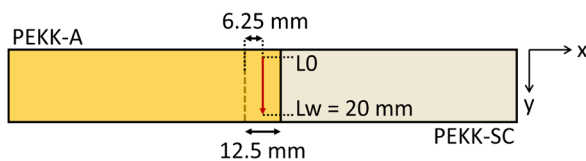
Schematic diagram indicating the welding path position, direction and dimensions on the PEKK-A/PEKK-SC assembly.
